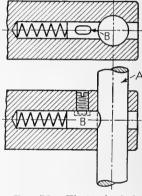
The end of the plunger B bearing against the hand lever A is concaved and prevented from turning by the dog-point setscrew engaging the splined slot. Friction is the only thing that holds the adjustable hand lever A in position.
